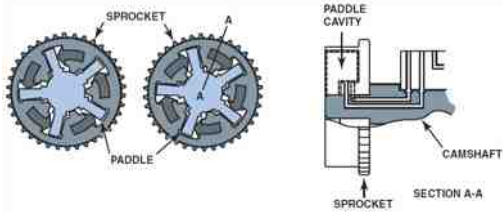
The camshaft is rotated in relation to the camshaft by the PCM to provide changes in valve timing.
